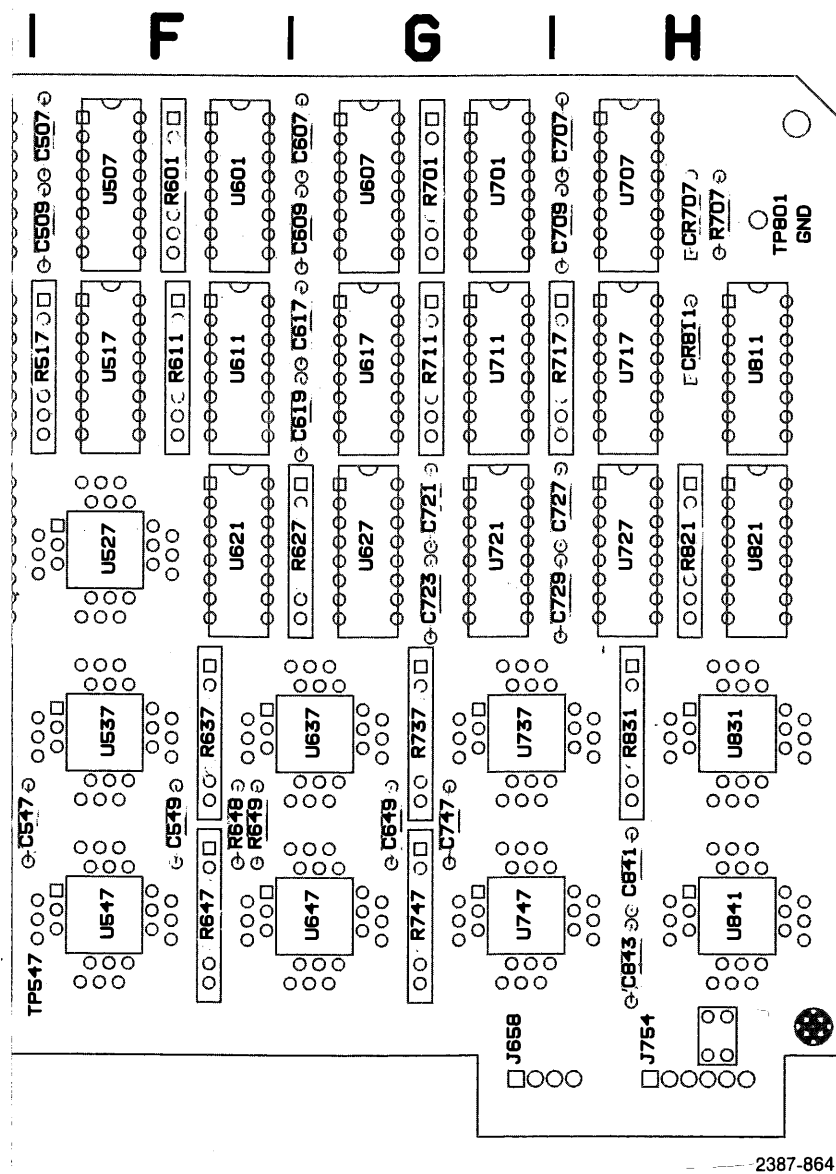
Timebase circuit board, assembly A20 (SN B030708 & up).
